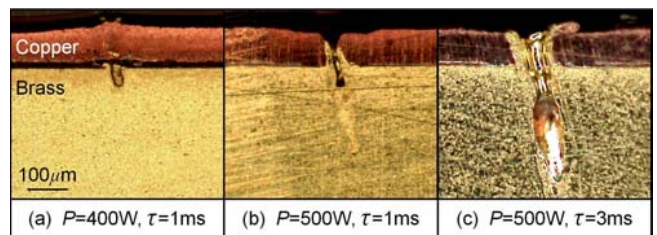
Cross-section view of welding results with rectangular pulse waveform
